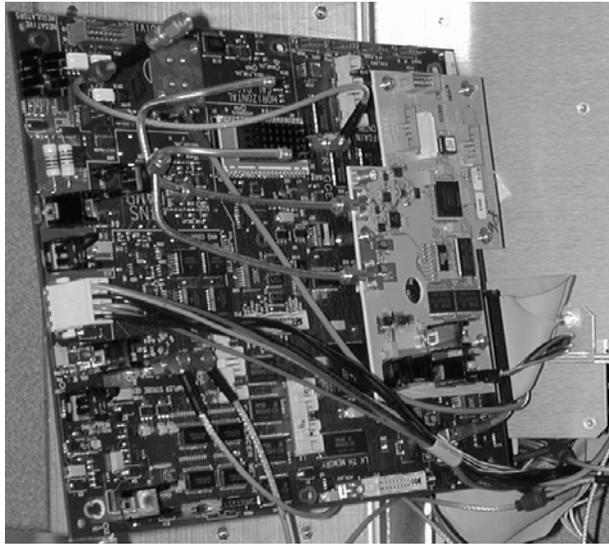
86100C A13 Acquisition Assembly and A14 Counter Assembly
